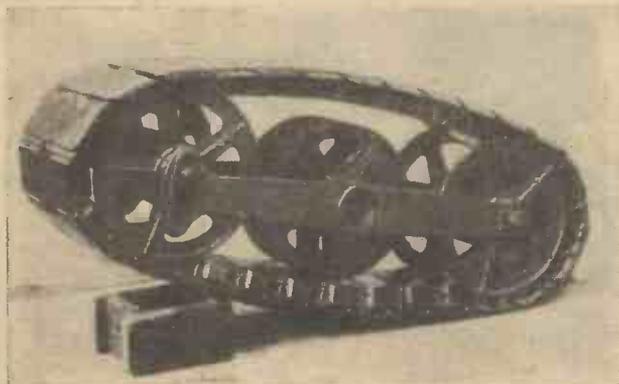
Rigid girder track, which provides an inclined plane for the surmounting of obstacles.
